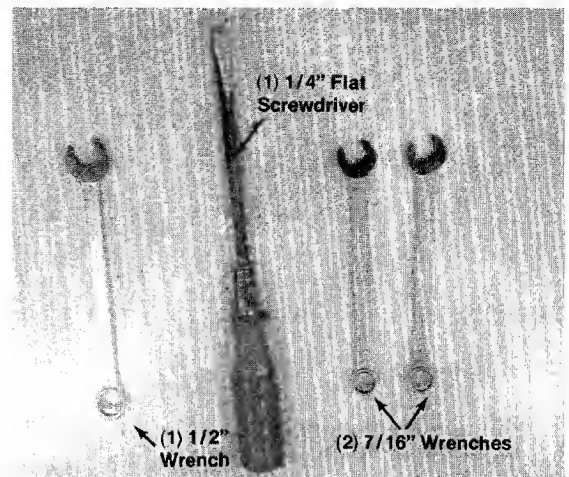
TOOLS REQUIRED FOR ASSEMBLY
